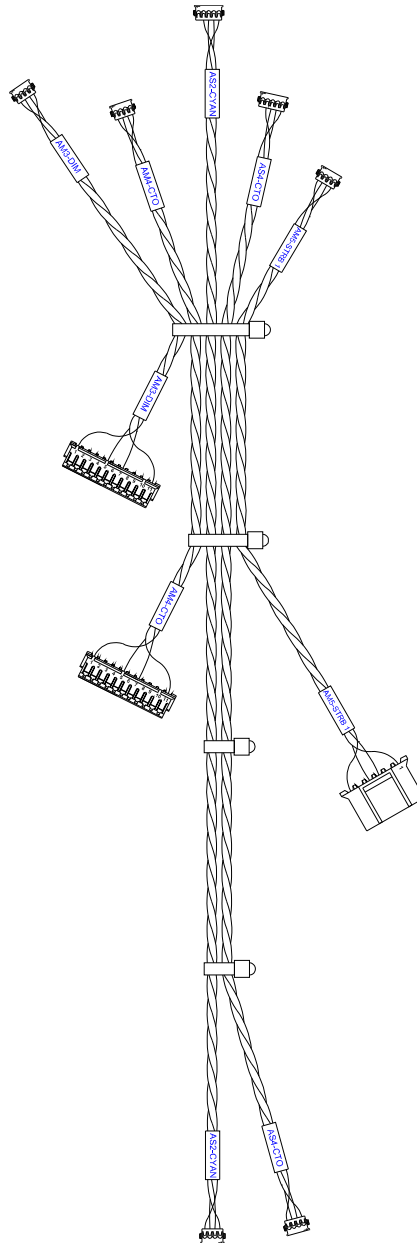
VL4000 Color Bulkhead 4 Cable Assembly
